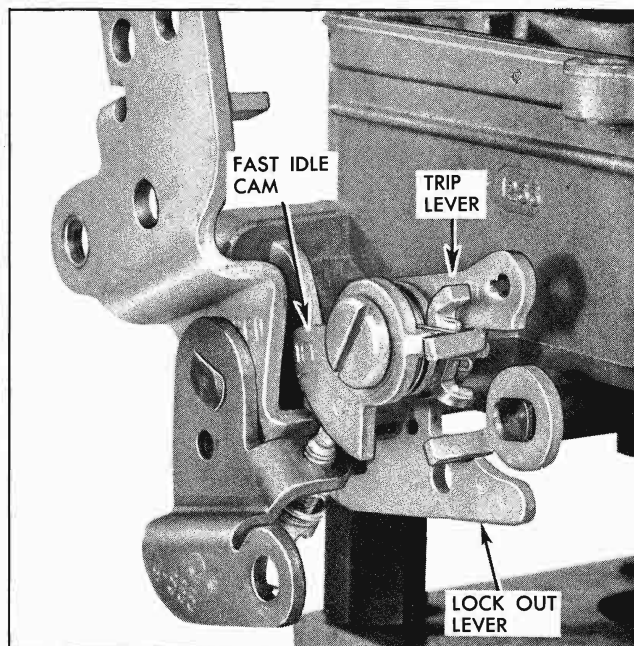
B-80 Location of Fast Idle Cam and Lockout Lever
